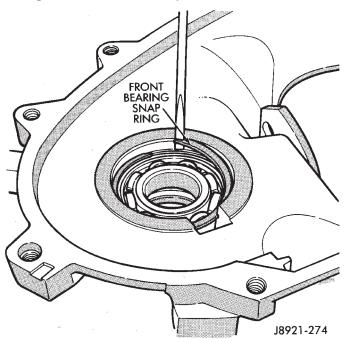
Front Output Shaft Front Bearing Snap-Ring Removal
